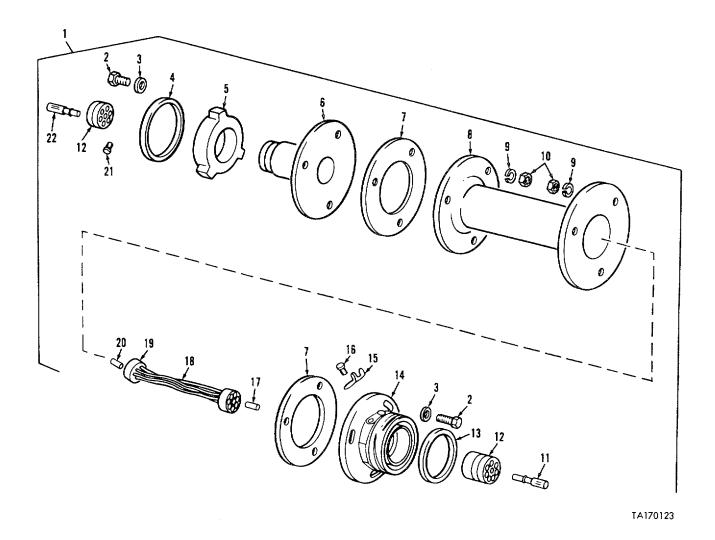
Headlamp adapter assembly (early model bulldozer).
